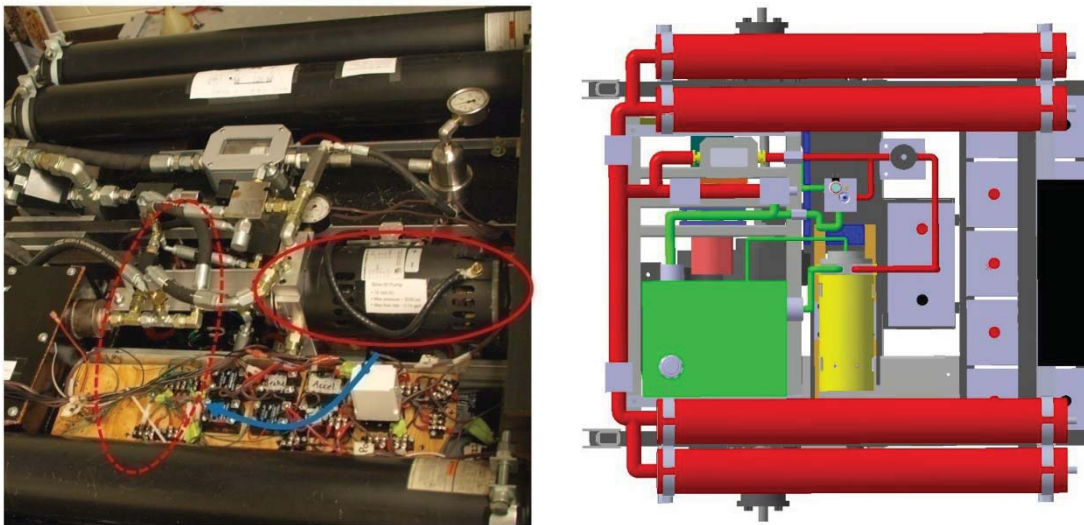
Relocation plan for the slow-fill pump achieving battery overhead space
